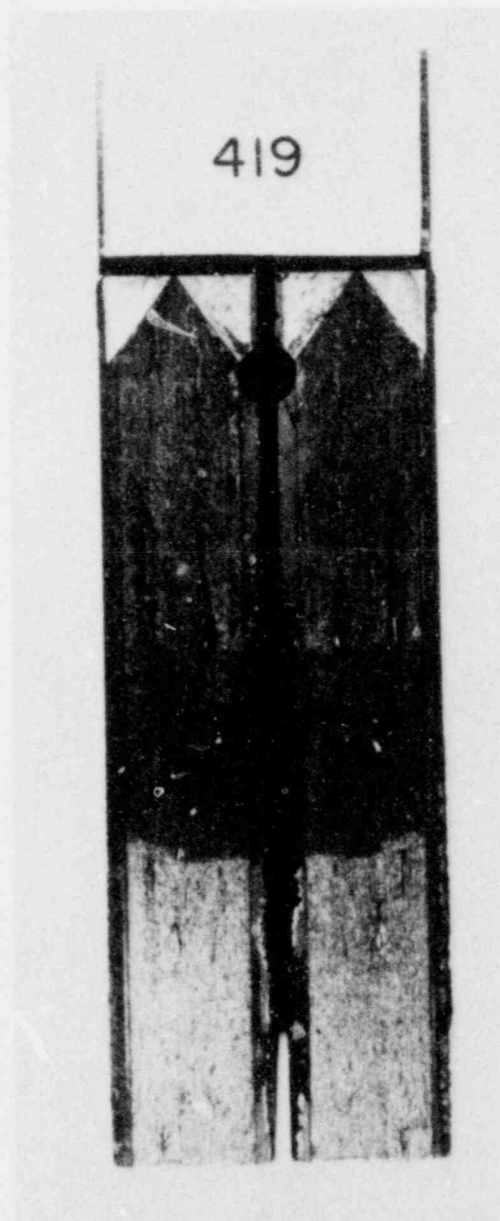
Typical Fracture Surface in $R_c 37$ Specimens.
